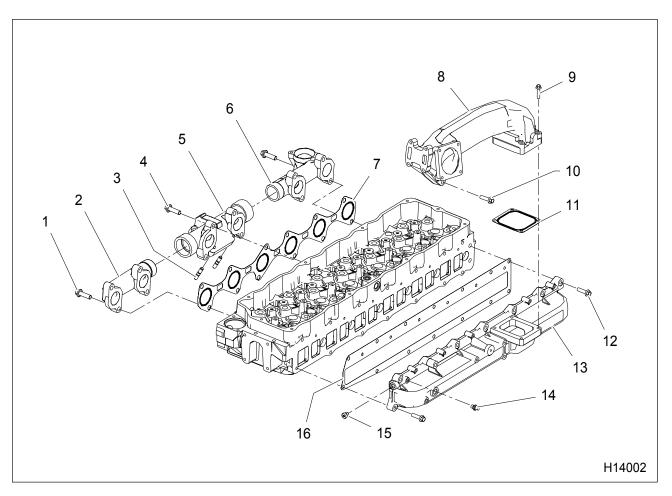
Intake manifold, inlet and EGR mixer, and exhaust manifold assemblies
